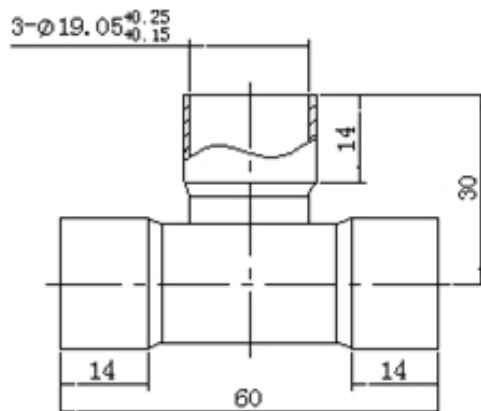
6 : Structure drawing of the gas balance T-type three -way valve
